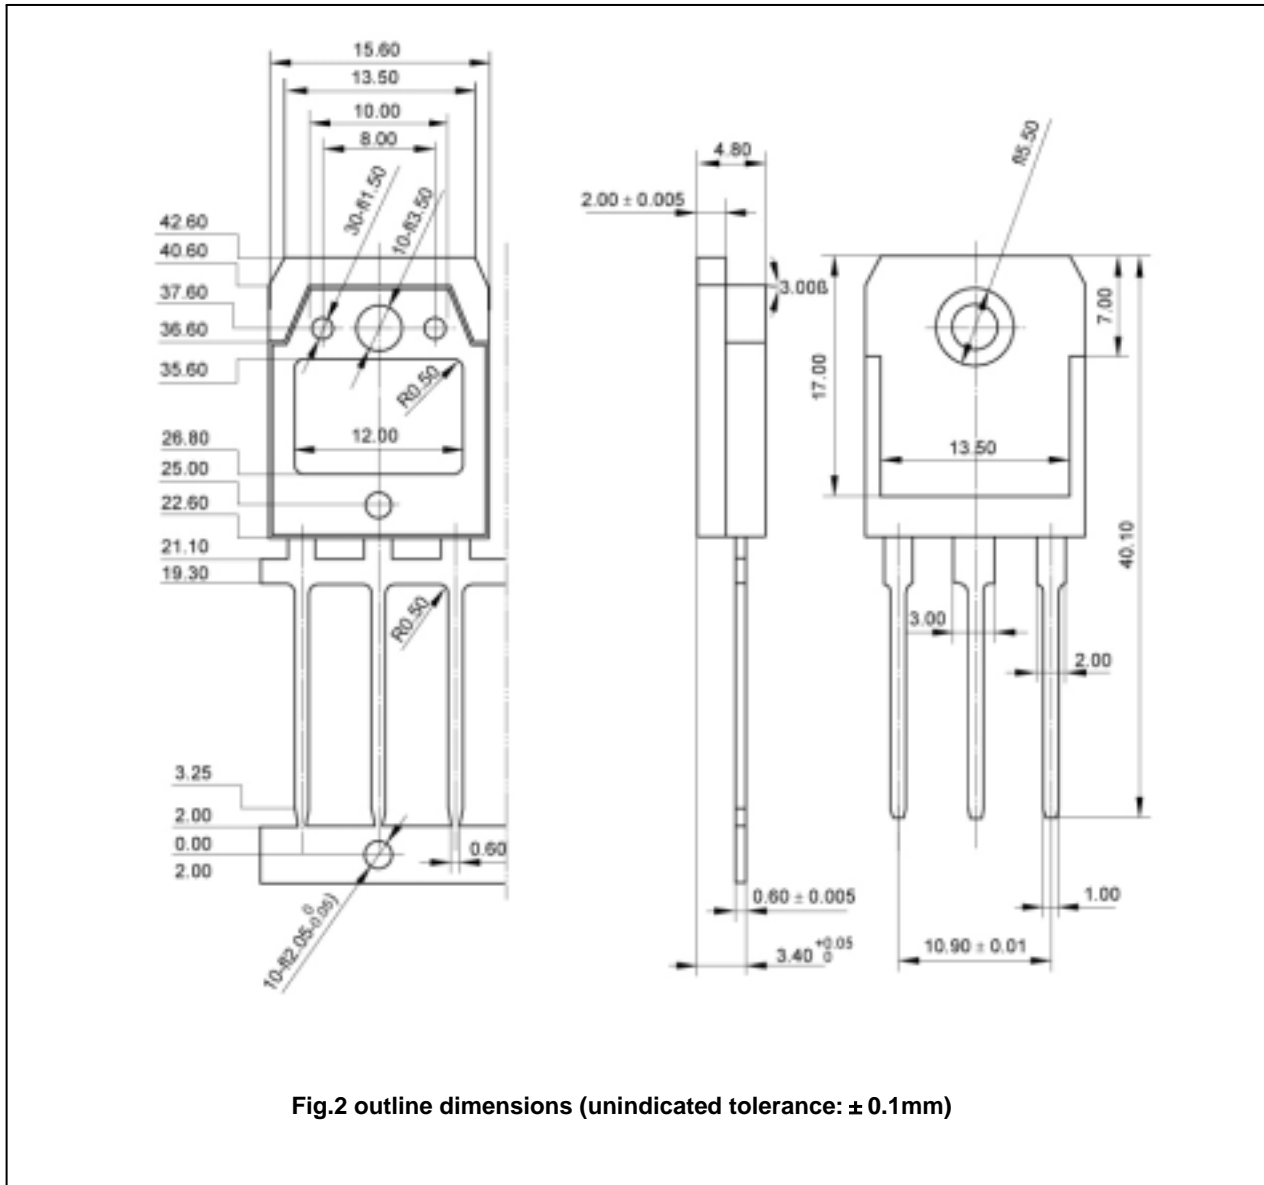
outline dimensions (unindicated tolerance: $\pm 0.1\text{mm}$)
